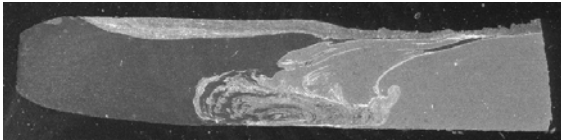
(b): Macrograph of weld produced at 950 rpm and 150 mm/min
